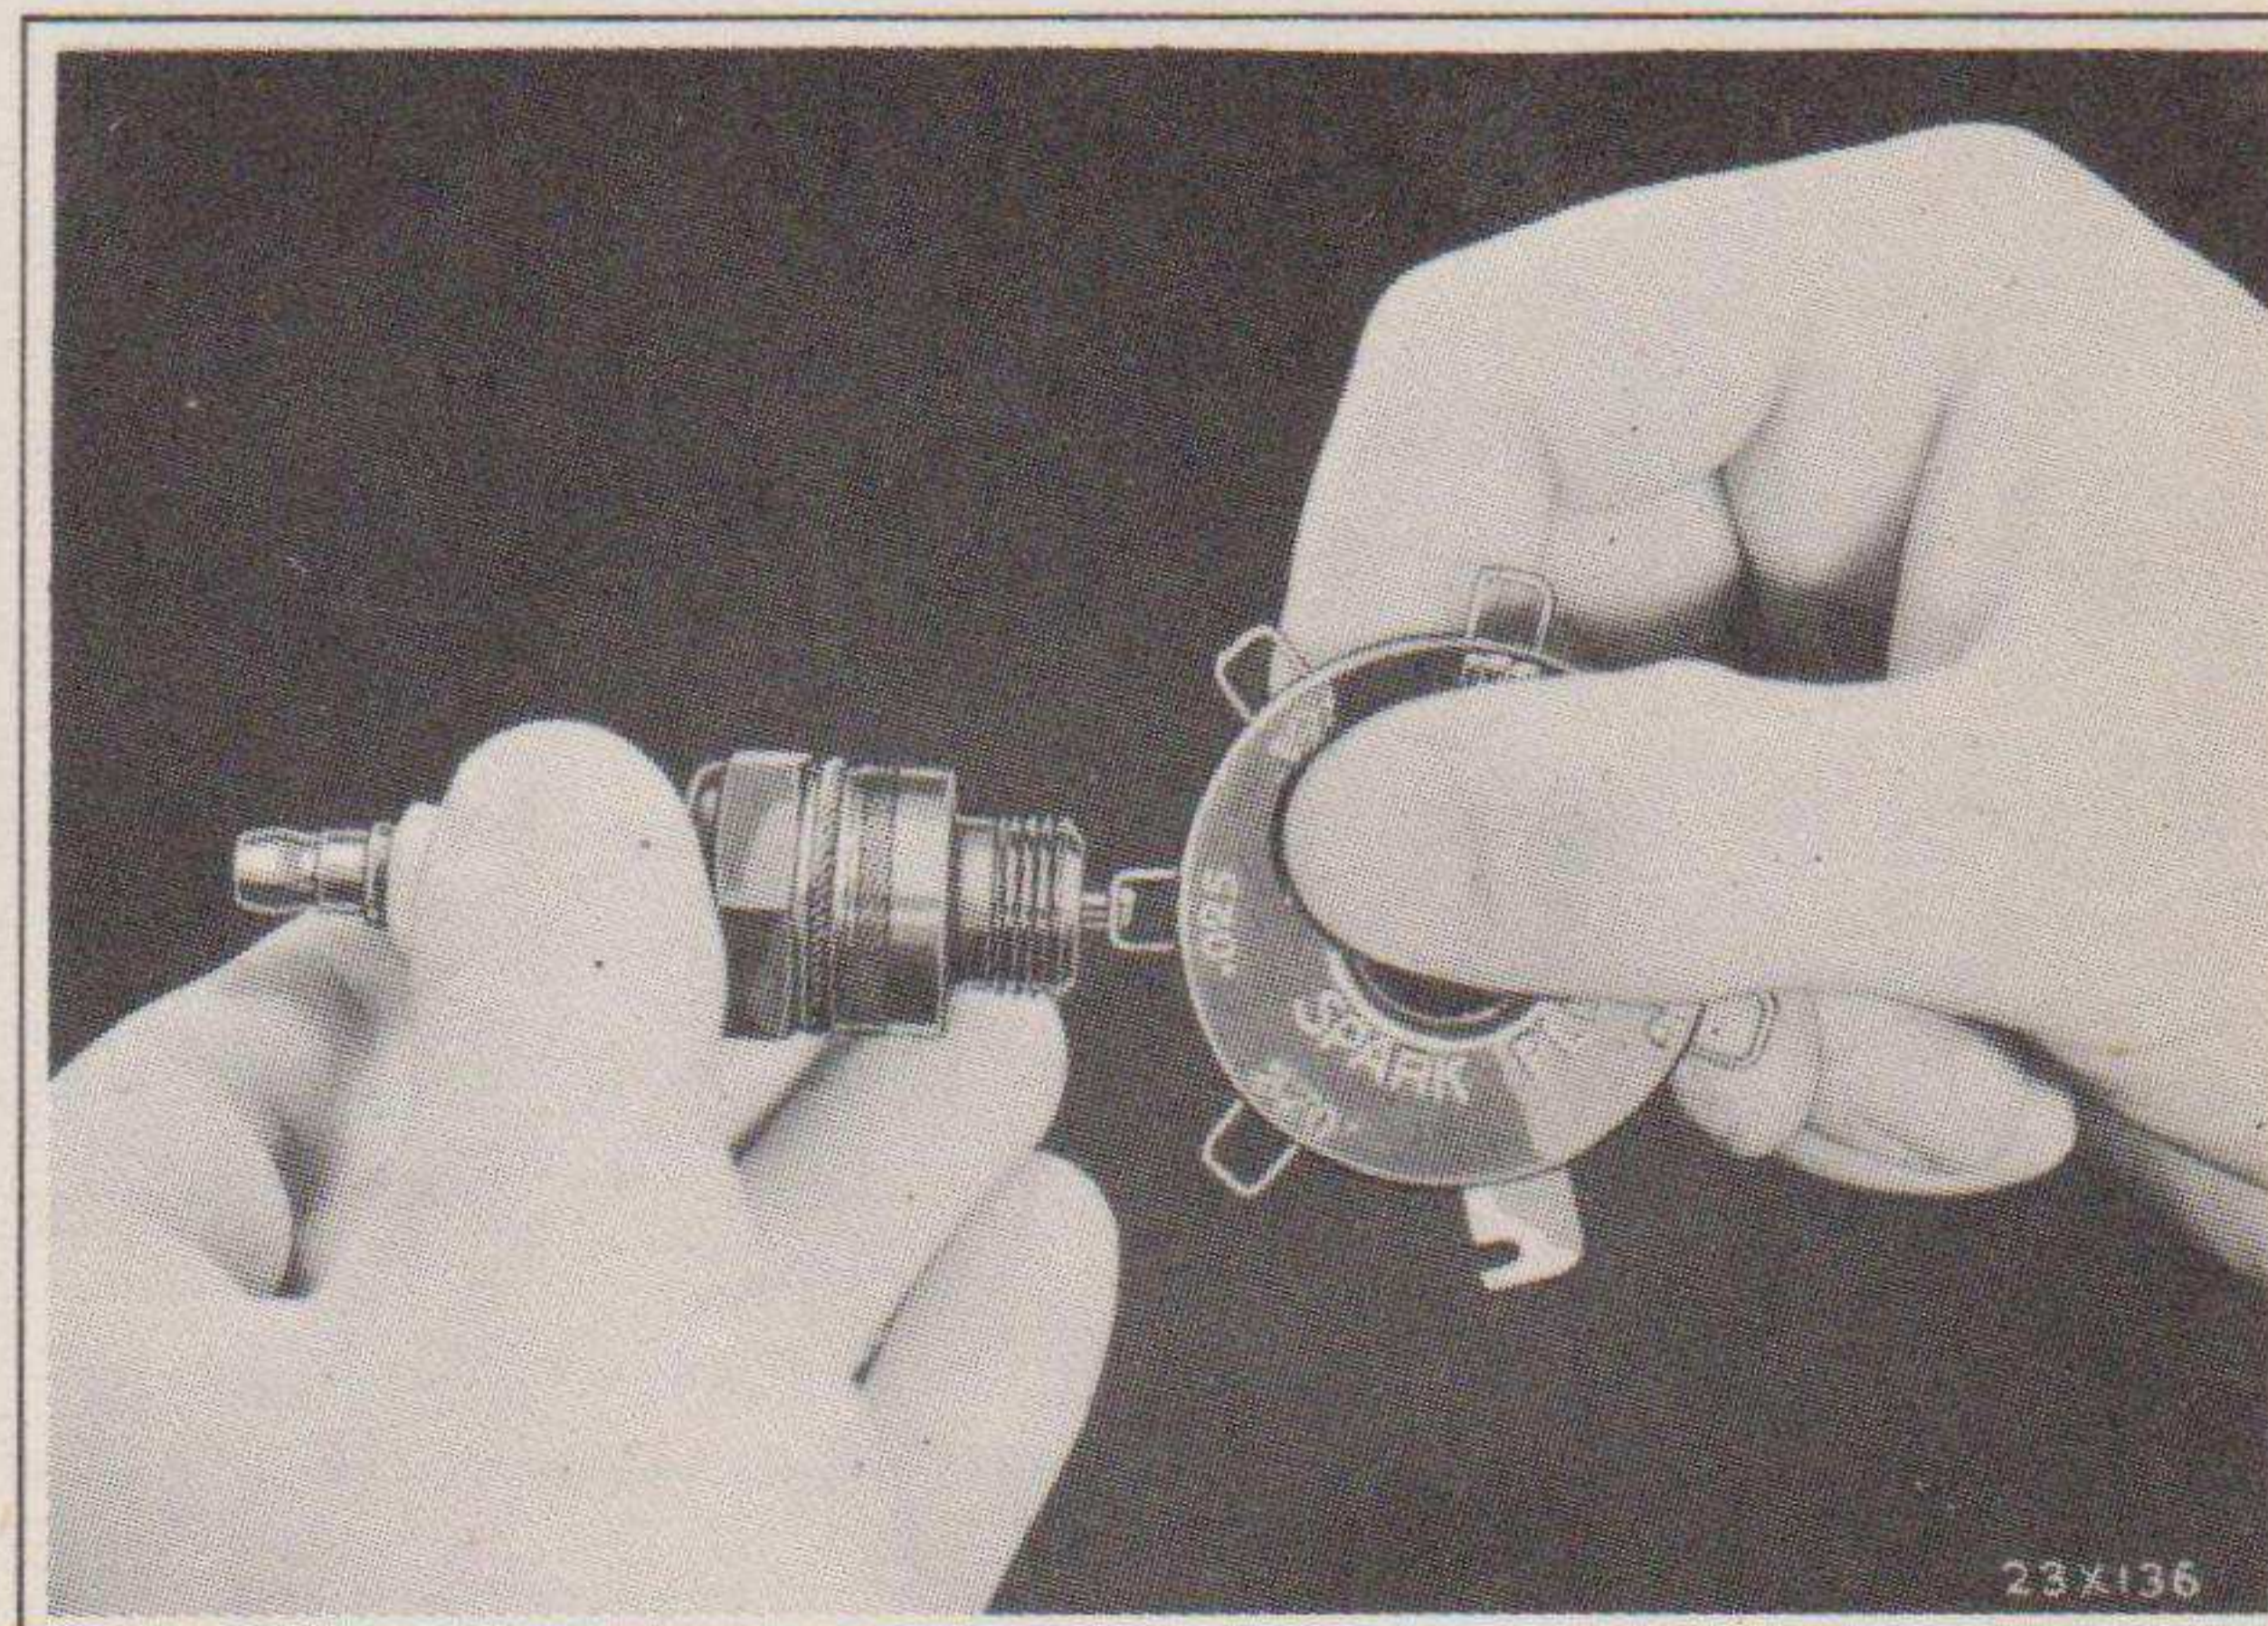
Measuring Spark Plug Adjustment with Gauge
